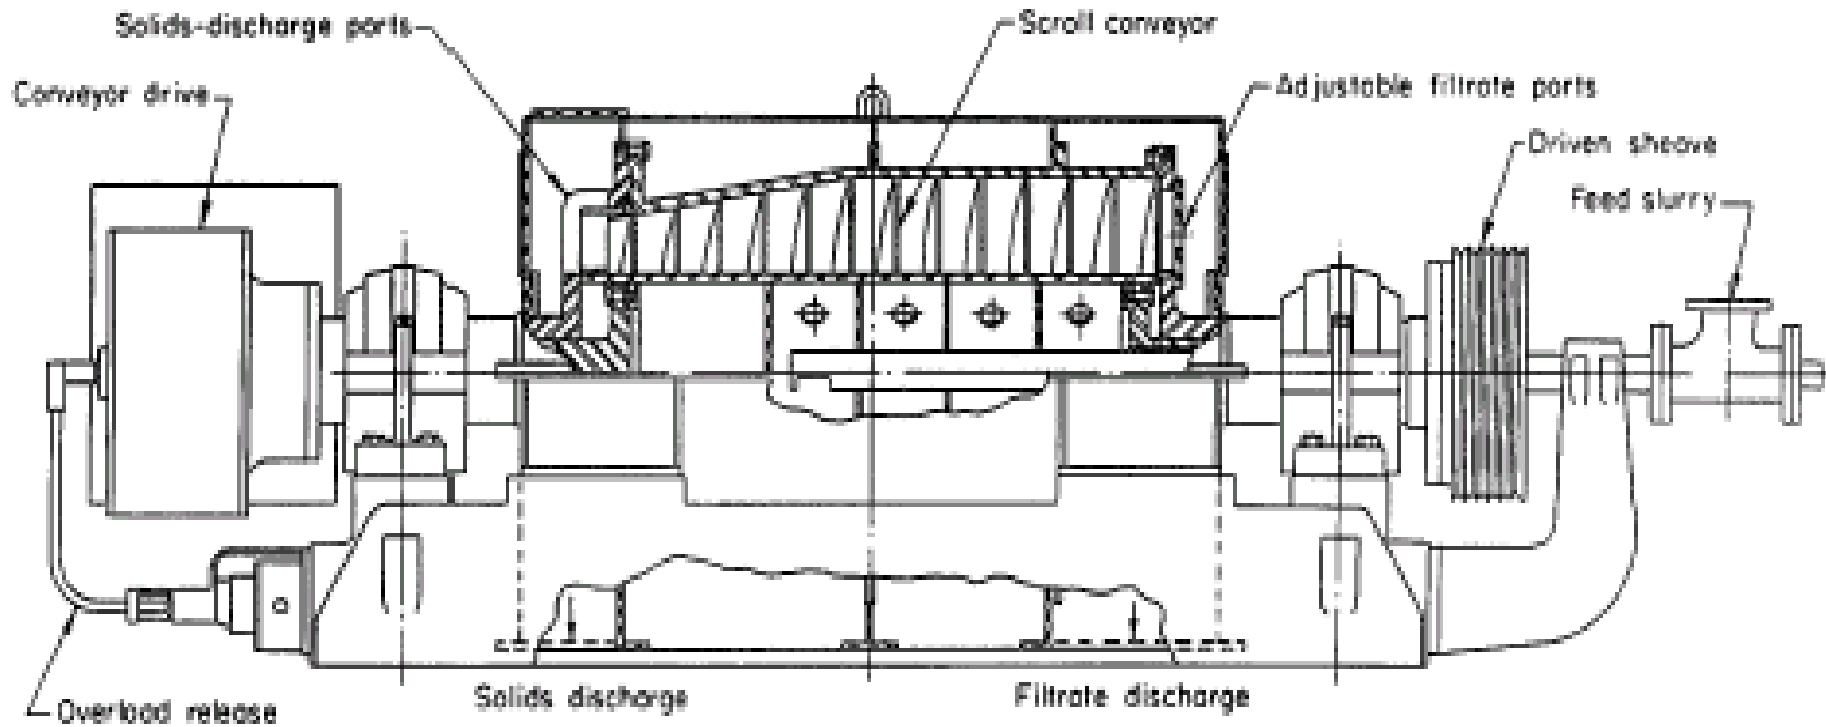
Cylindrical-conical solid-bowl centrifuge. (Bred Machine Co.)
